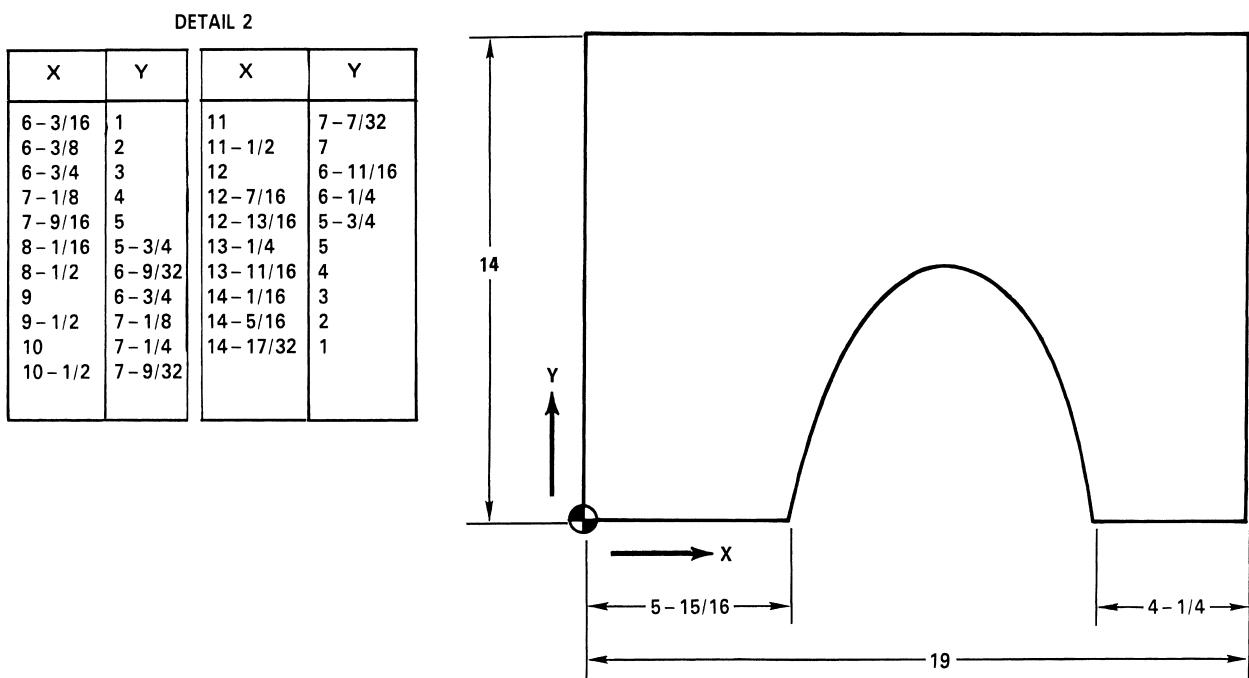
Gun Fairing Shipping Container (Sheet 1 of 3)
